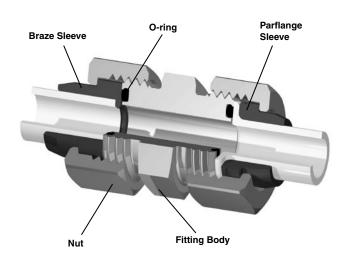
Seal-Lok Lite union cutaway with flanged and brazed assemblies
